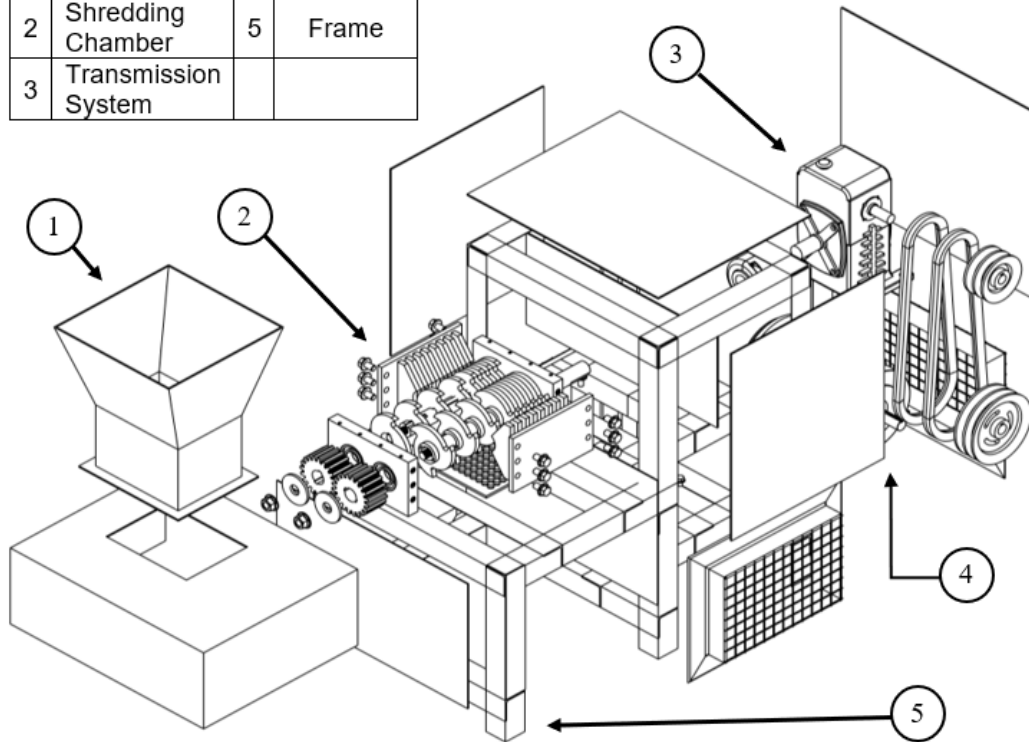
Mini twin-shaft PET bottle shredder exploded view
